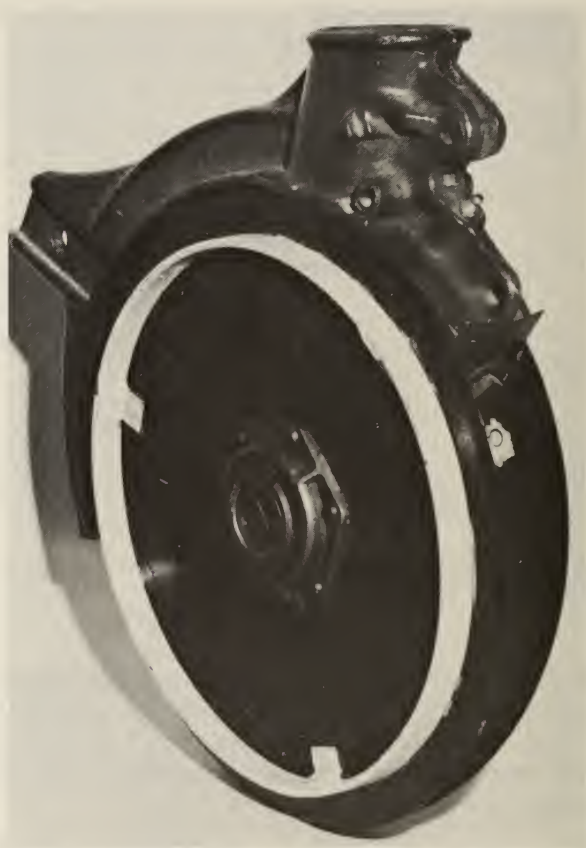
Flange rings spot-welded to drill discs to control depth of seeding.
